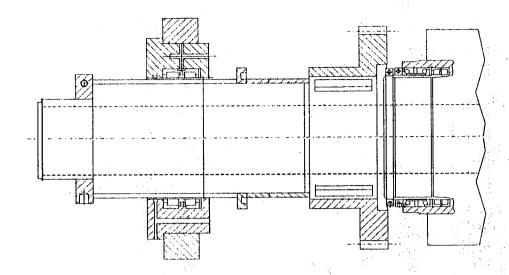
A Spindle Bearing Arrangement of a Finishing Lathe [22]
